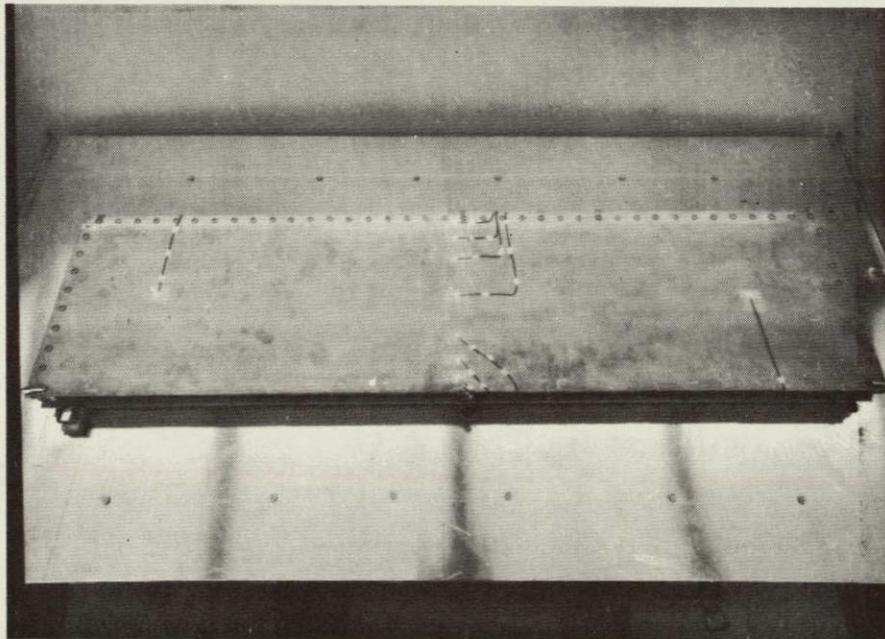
BORON/ALUMINUM PANEL SHOWING THERMOCOUPLES INSTALLED
